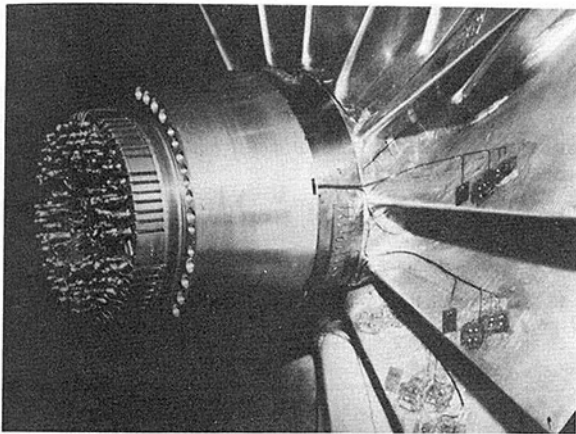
Radial impeller with strain gages and mounted 8-channel telemetry transmitter
